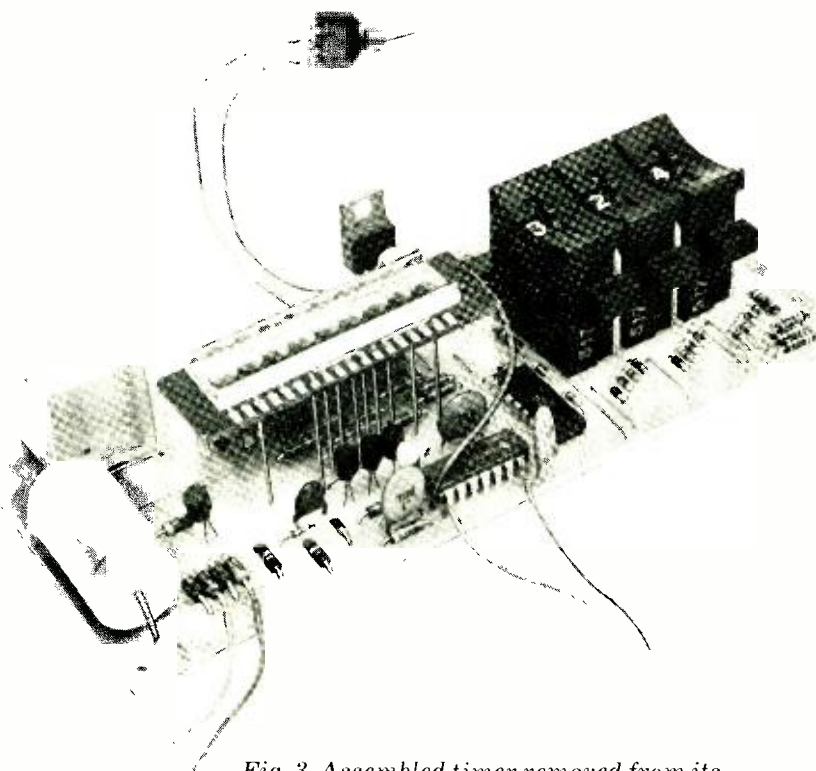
Assembled timer removed from its enclosure shows how the display board mounts above main board. Cube at left rear is relay.
